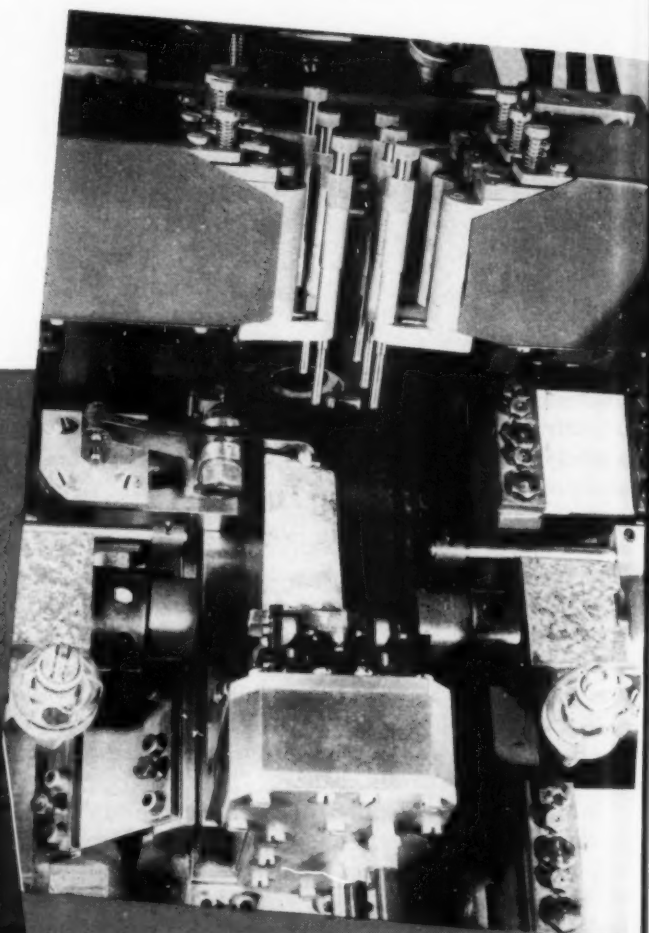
Above — View of gage system showing how the six strain-gage probes contact the cradled blade
